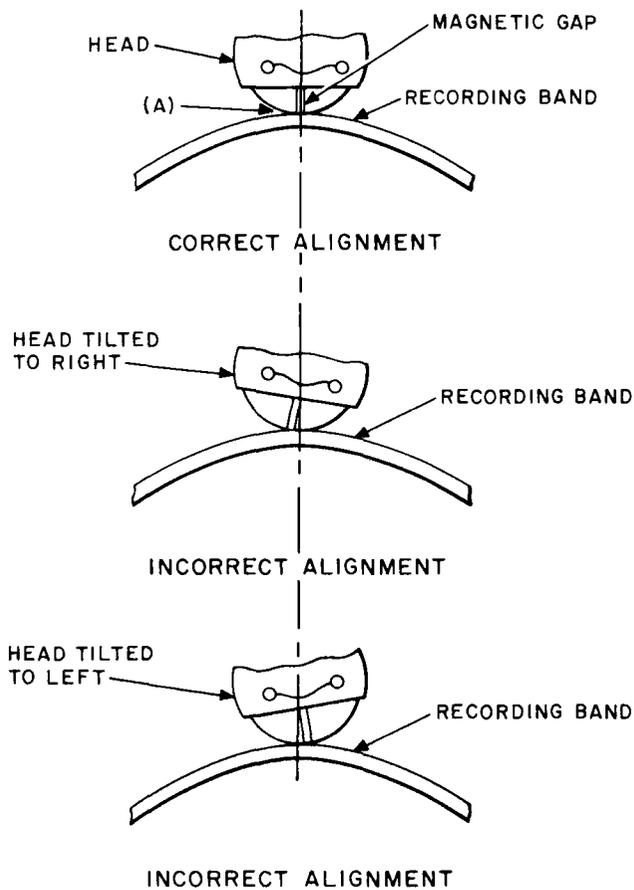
Position of Magnetic Gap of Head on Recording Band — KS-12068 Recorder-Reproducers
